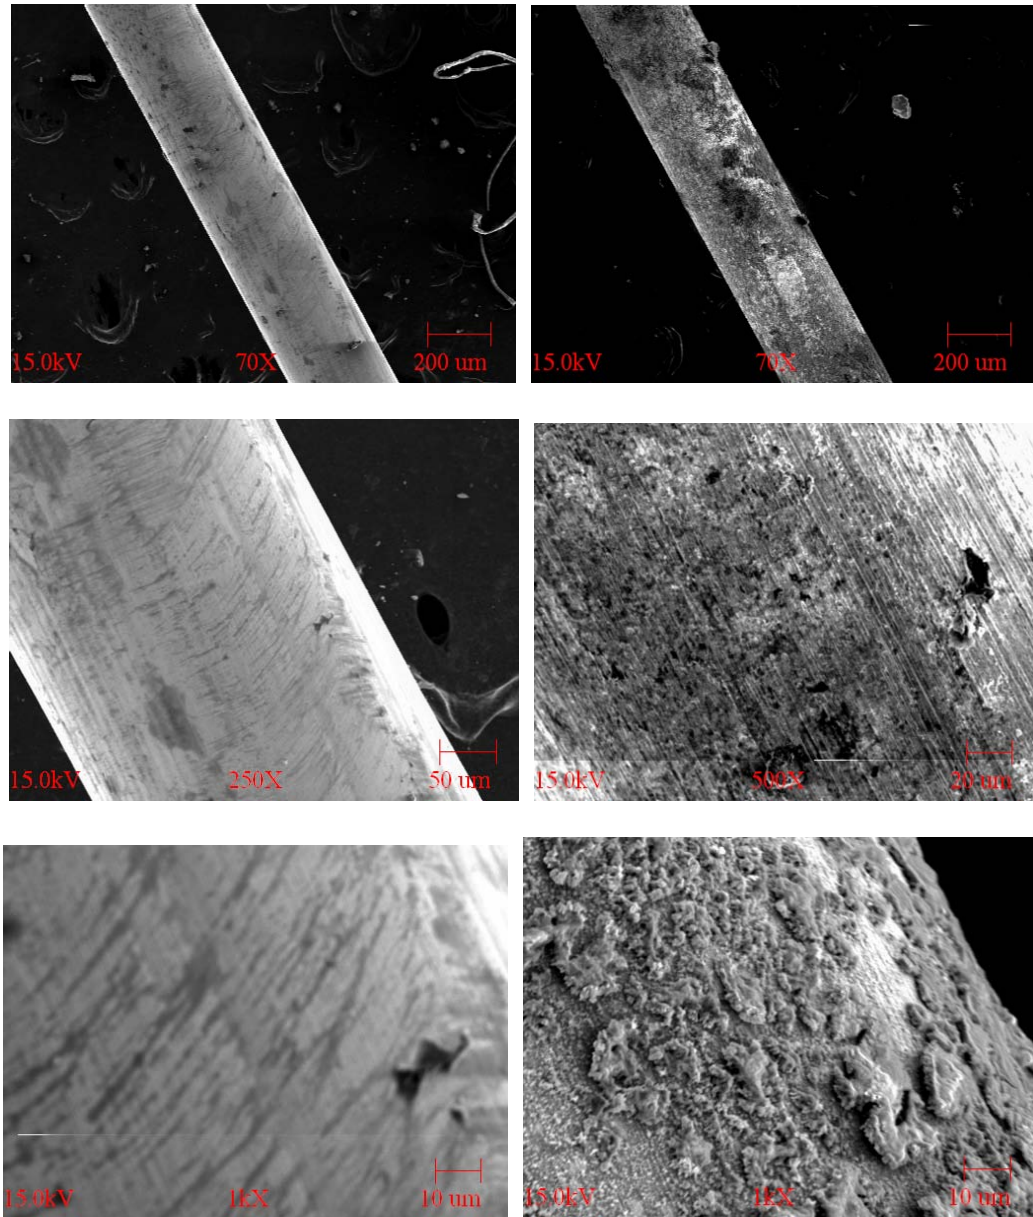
Surface of the uncoated tool before (left) and after machining (right) at different magnifications
